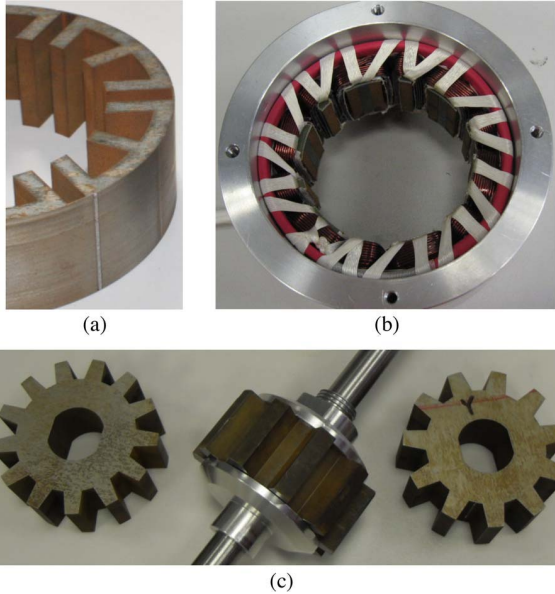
Photographs of E-core SPM prototype machines. (a) Stator lamination. (b) E-core six-pole stator. (c) 10-, 11-, and 13-pole rotors [31]
